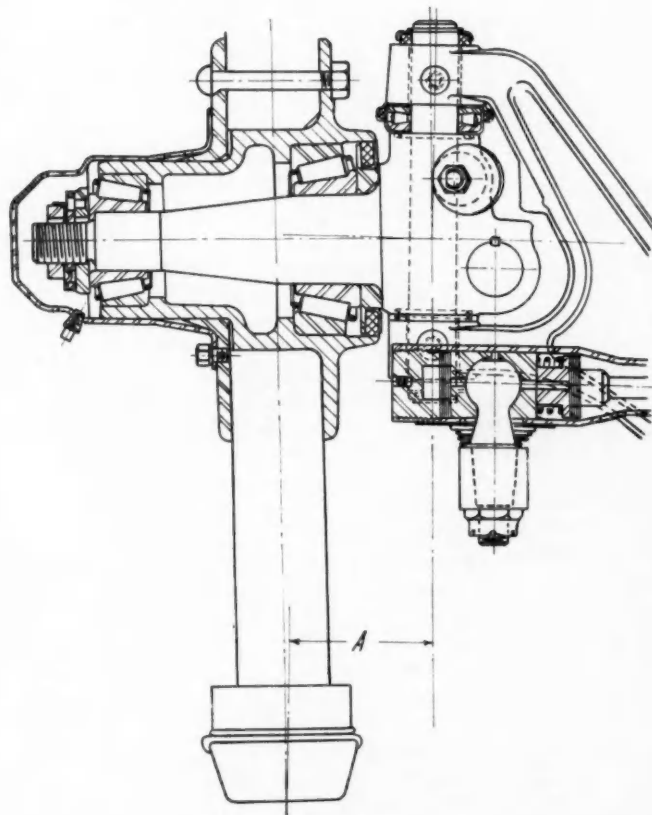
TYPICAL FRONT-AXLE END BEFORE THE ADVENT OF FOUR-WHEEL BRAKES
